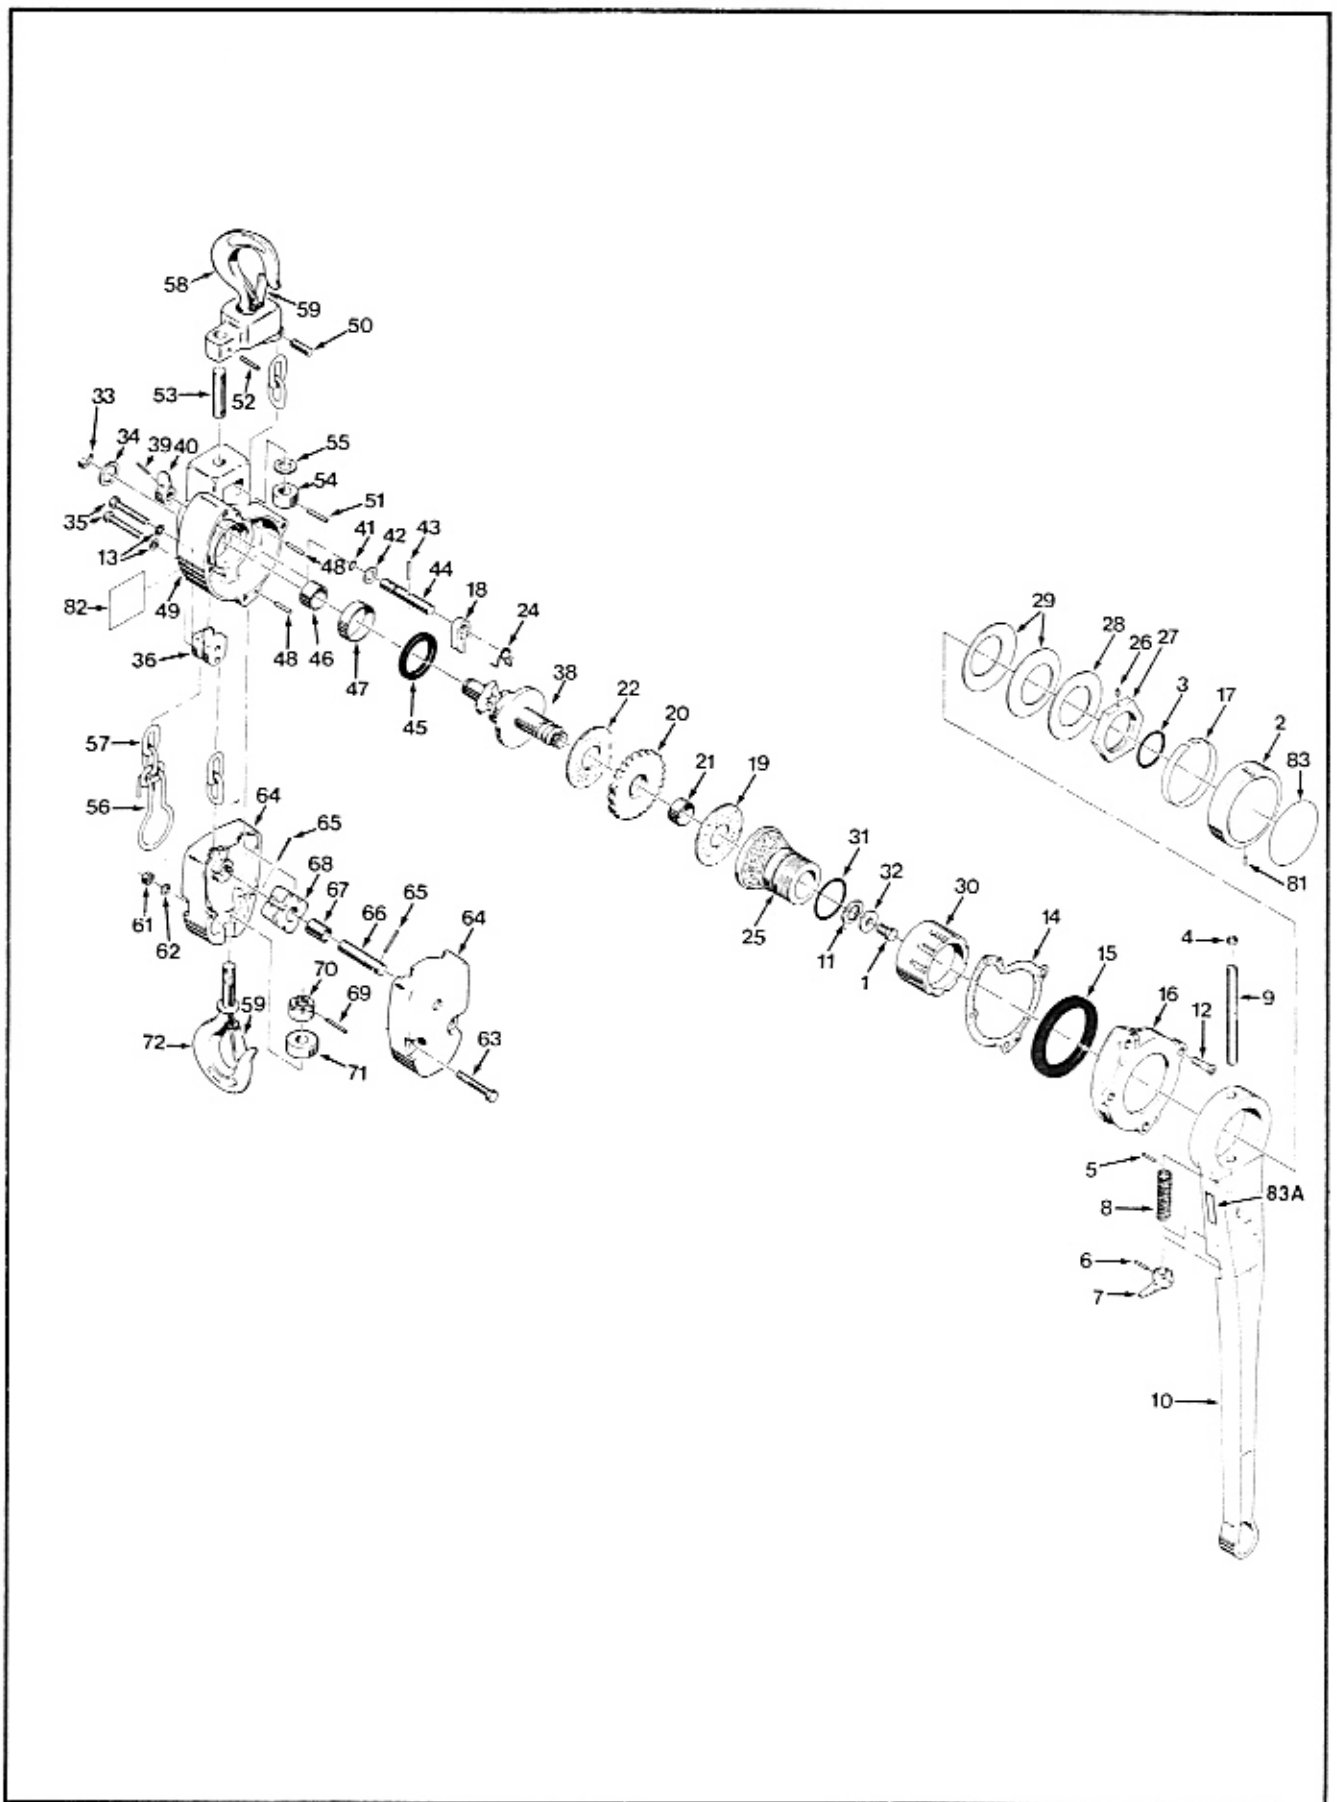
EXPLODED ILLUSTRATION OF MODEL MAL-15-2
